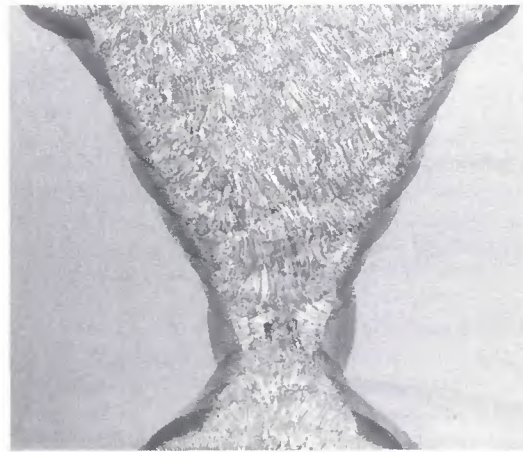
A macrosection of a Q1N test panel welded with SAF LEXAL T 22.9.3N consumable.
